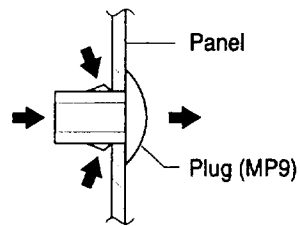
A. Plug Removal for Rear Terminals Retrofitting
